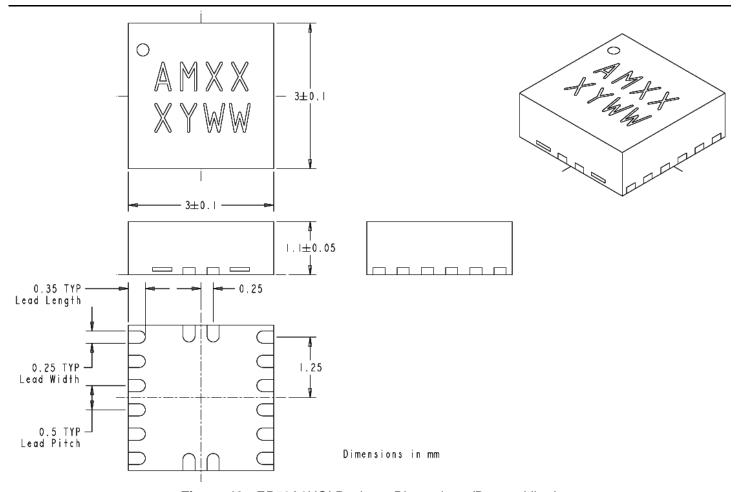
EP53A8HQI Package Dimensions (Bottom View)
